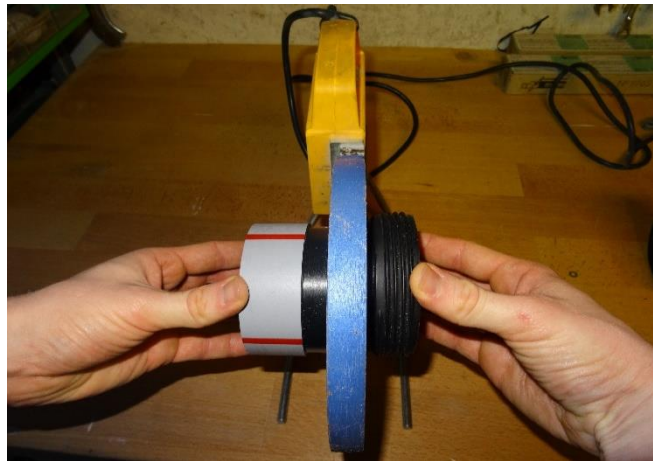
When the temperature of the hot welding plate is between 200 and 220°C the two pieces that need to be welded together, can be held on each side to the plate.
